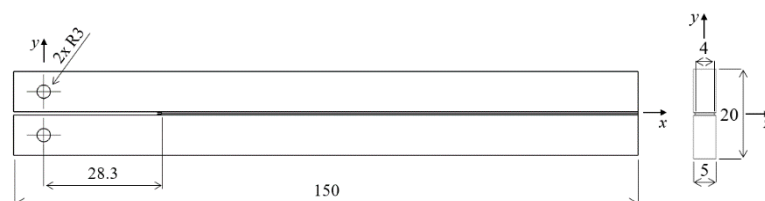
Test specimen for DCB tests (dimensions in mm).
